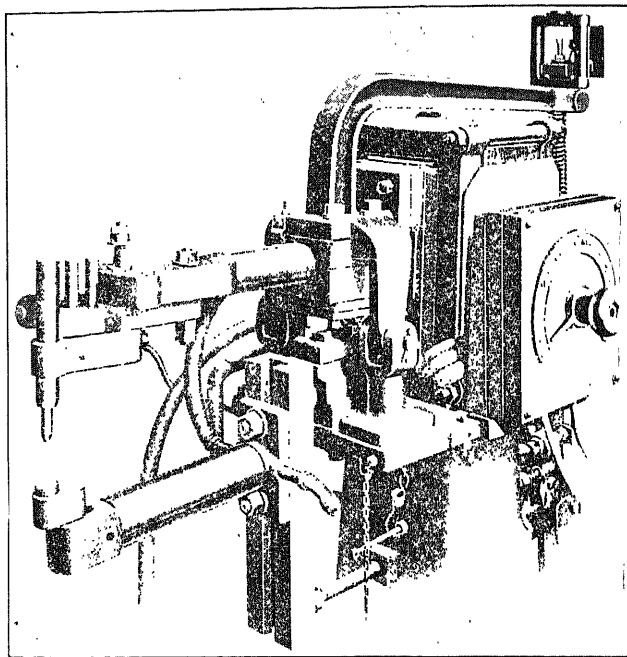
Typical Construction of Light Spot-Welding Machine.
